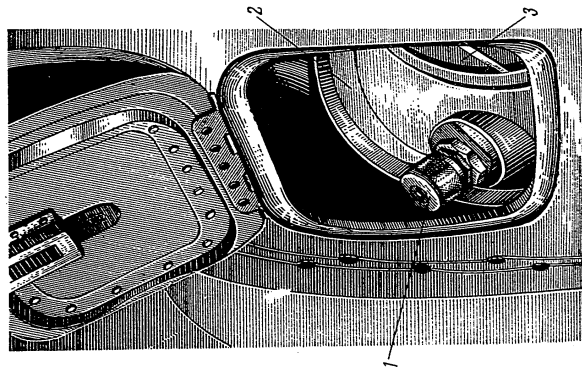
DIPSTICK INSTALLED IN OIL TANK
